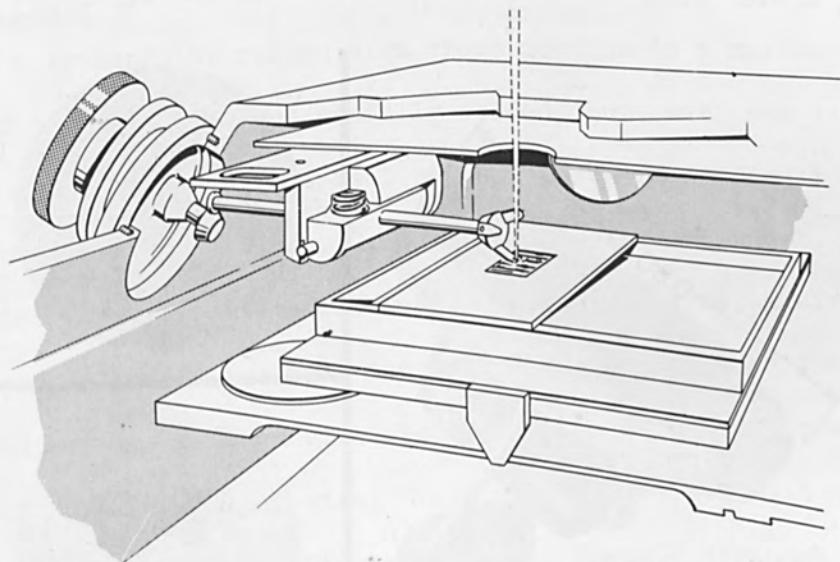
Micromanipulator for Welding Microcomponents
